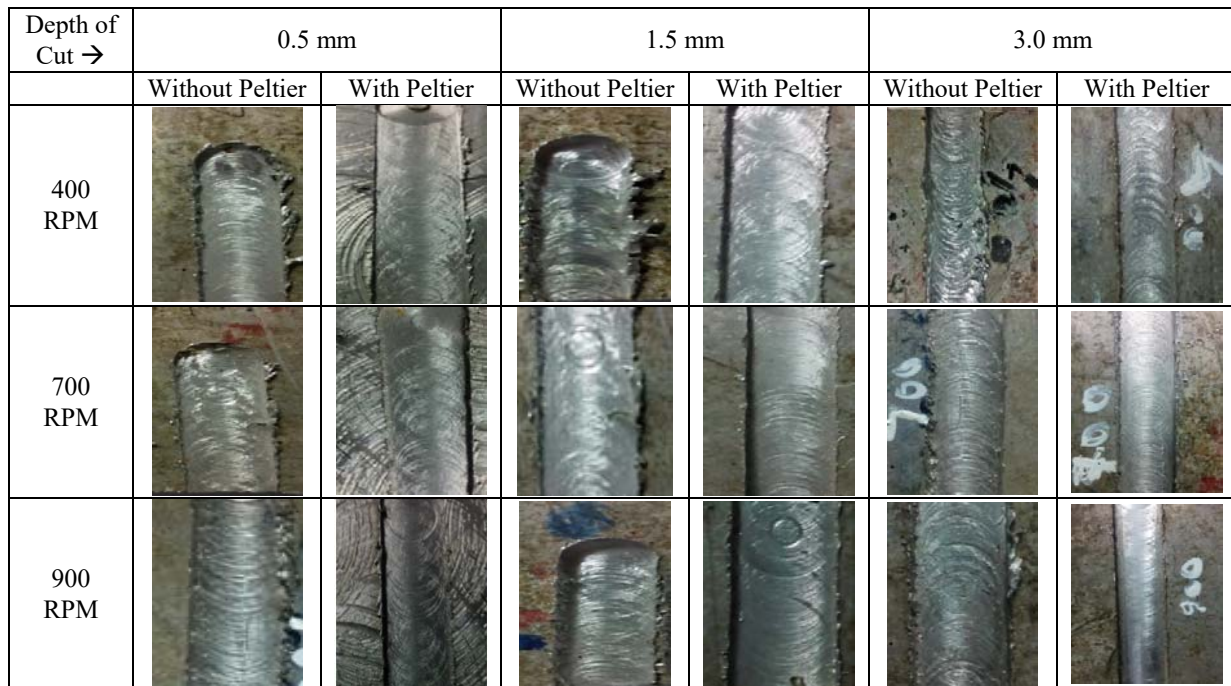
Surface images after machining with and without peltier chip at different depth of cut
